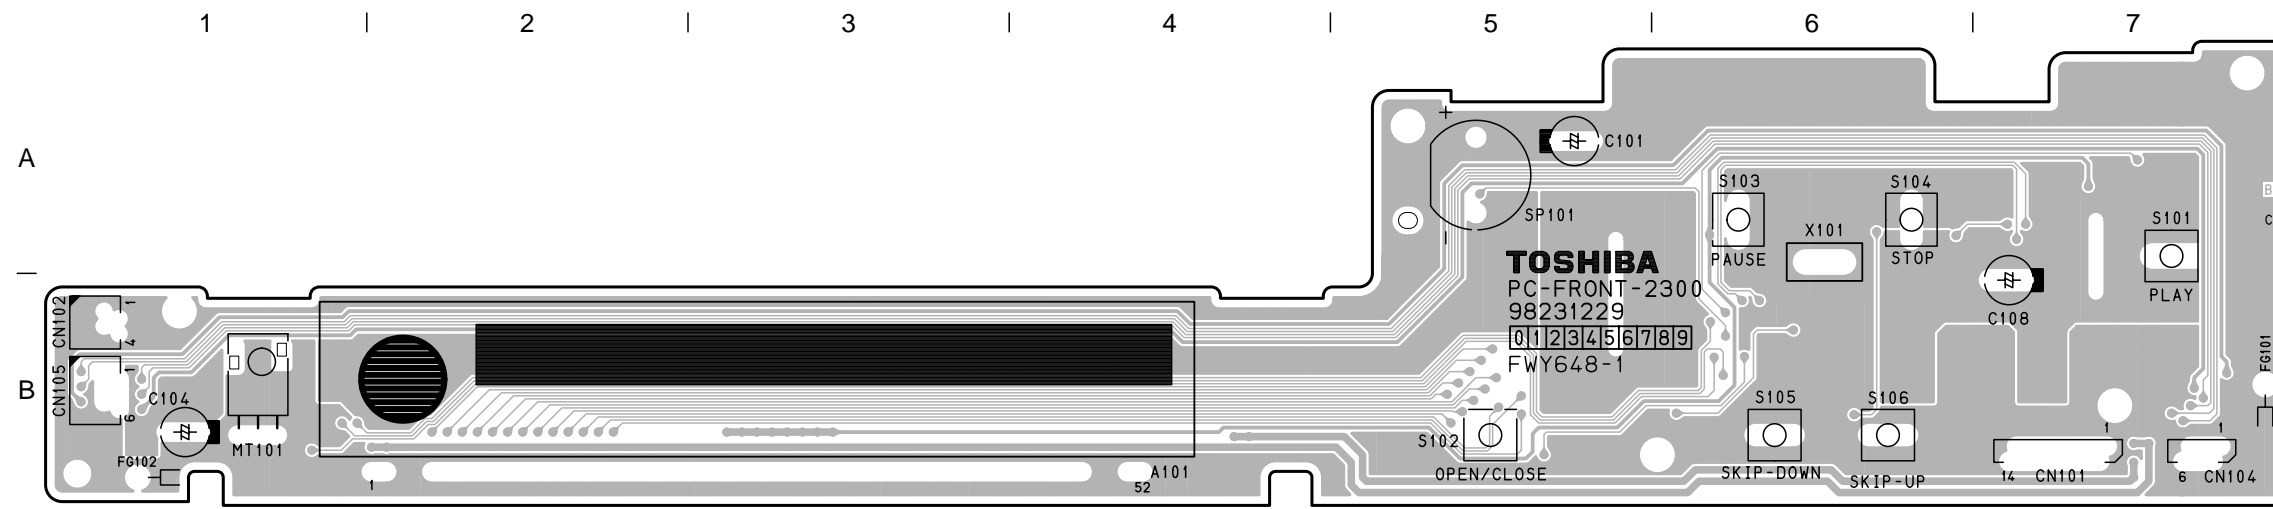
EU03 Front Display PC Board (Top Side)
